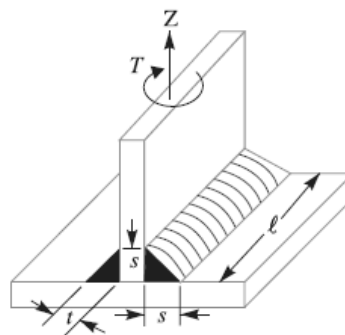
Long fillet weld subjected to torsion.
